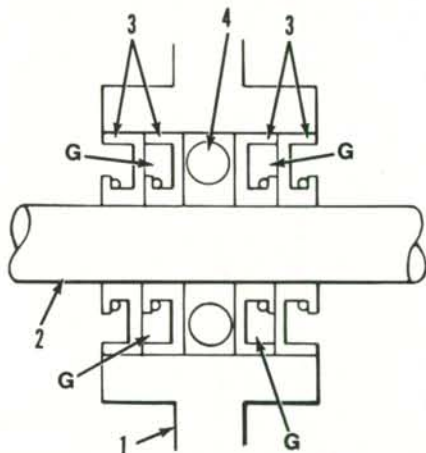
Cross-sectional view of bearing carrier assembly used on JF650 models. Fill area (G) between inner and outer seals with a suitable high temperature grease.
